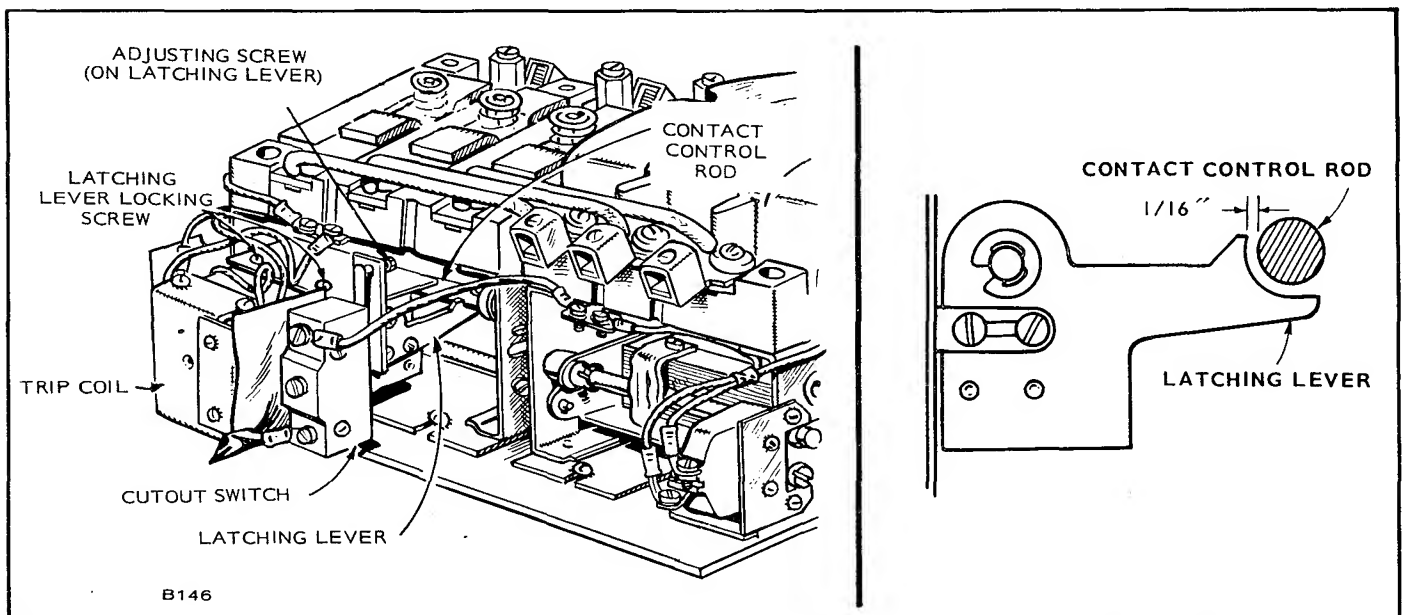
LATCH MECHANISM ON MECHANICALLY-HELD TRANSFER SWITCH
